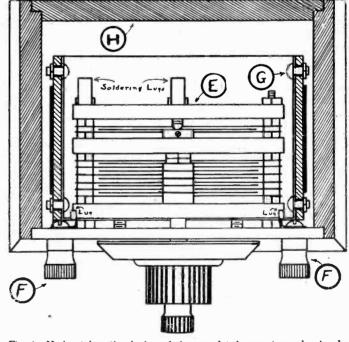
Horizontal sectional view of the completed wave trap, showing how the coil and condenser are mounted.
